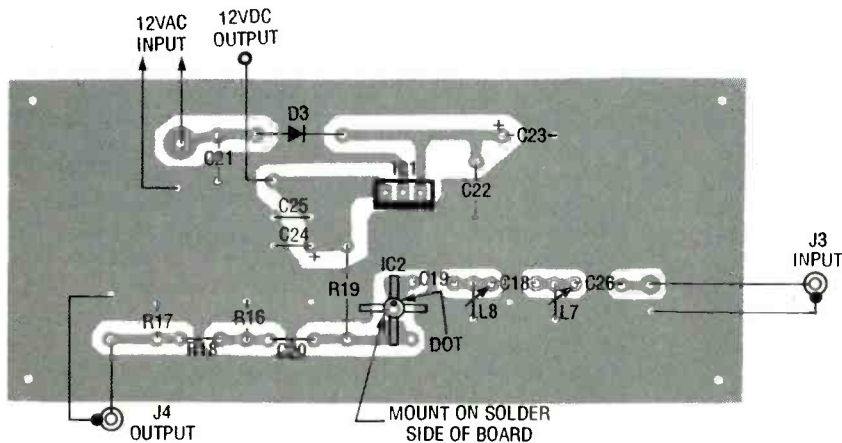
PARTS-PLACEMENT DIAGRAM for the amplifier/power supply board.
